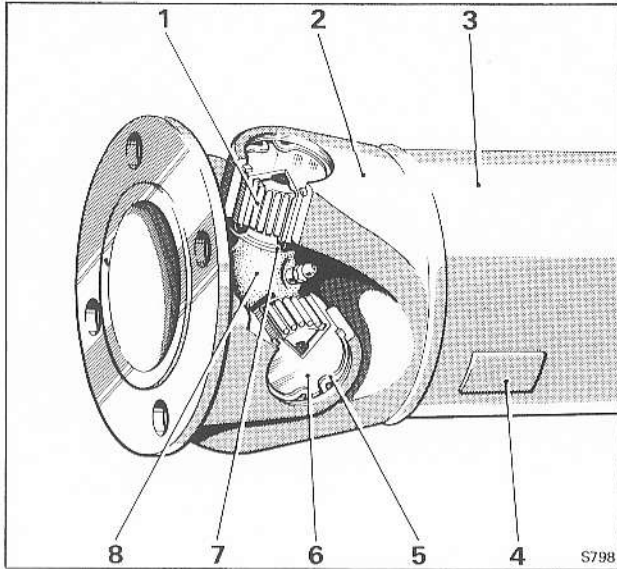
Propeller shaft, centring bush/lip seal assembly (Flexible coupling)
